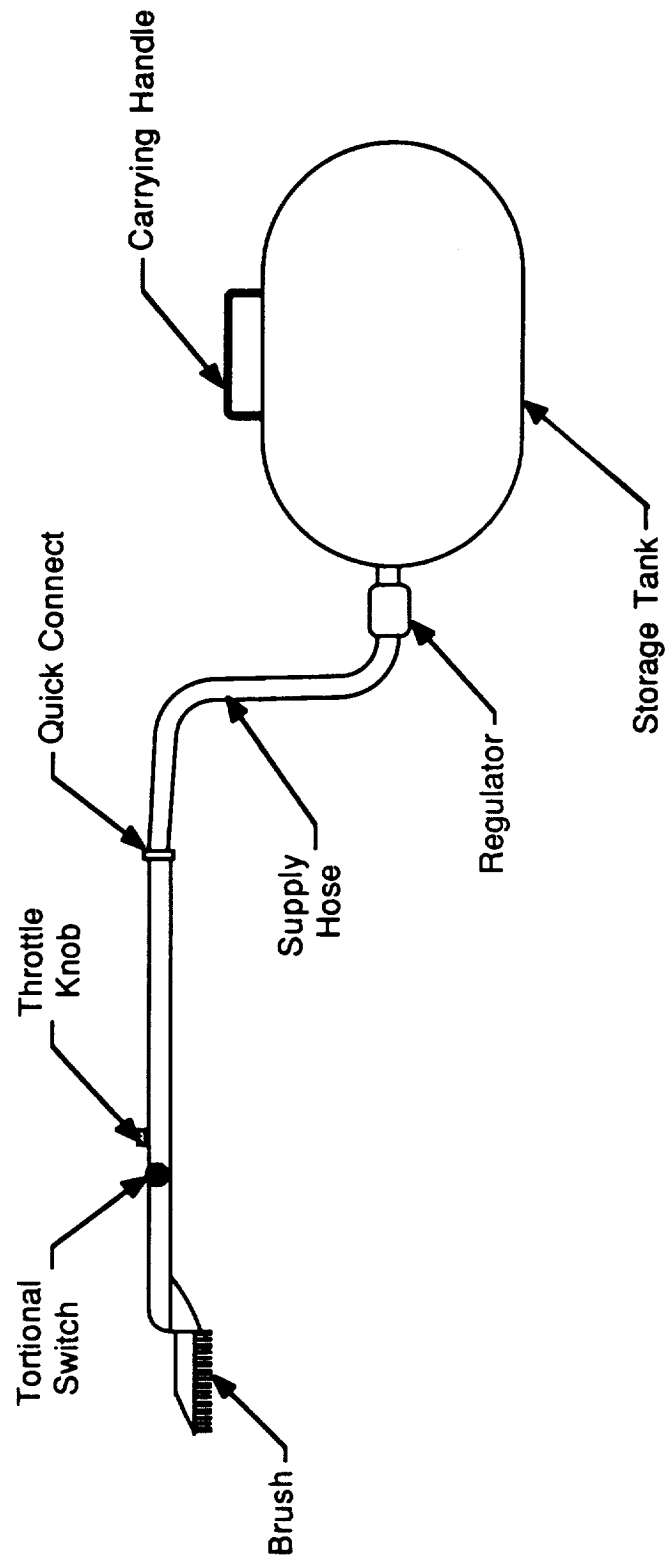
DRAWING OF BRUSH-BLOWER DESIGN
